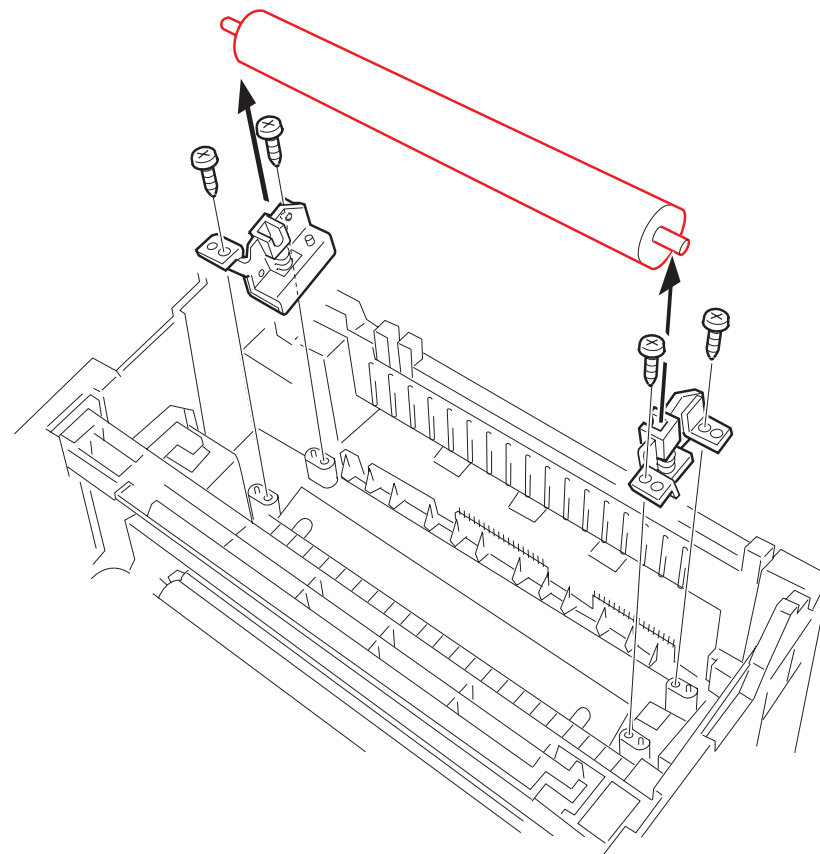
“Roll-Press / Bearing-Pressure Roll” Removal
